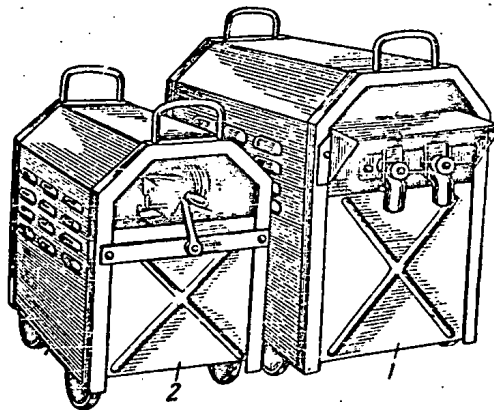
CT3-34 welding transformer and PCT3-34 regulator (reactor):
